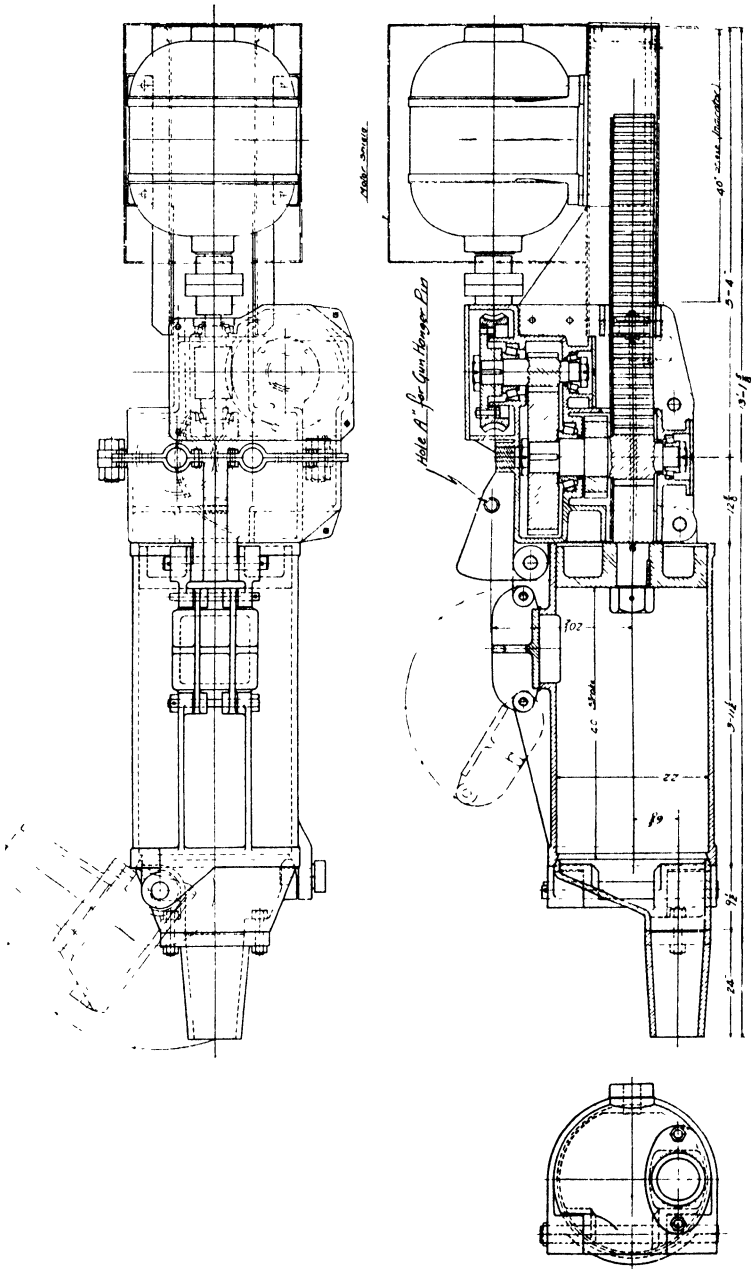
Assembly of electric clay gun (Courtesy of Edguy E. Brostus, Inc.)
